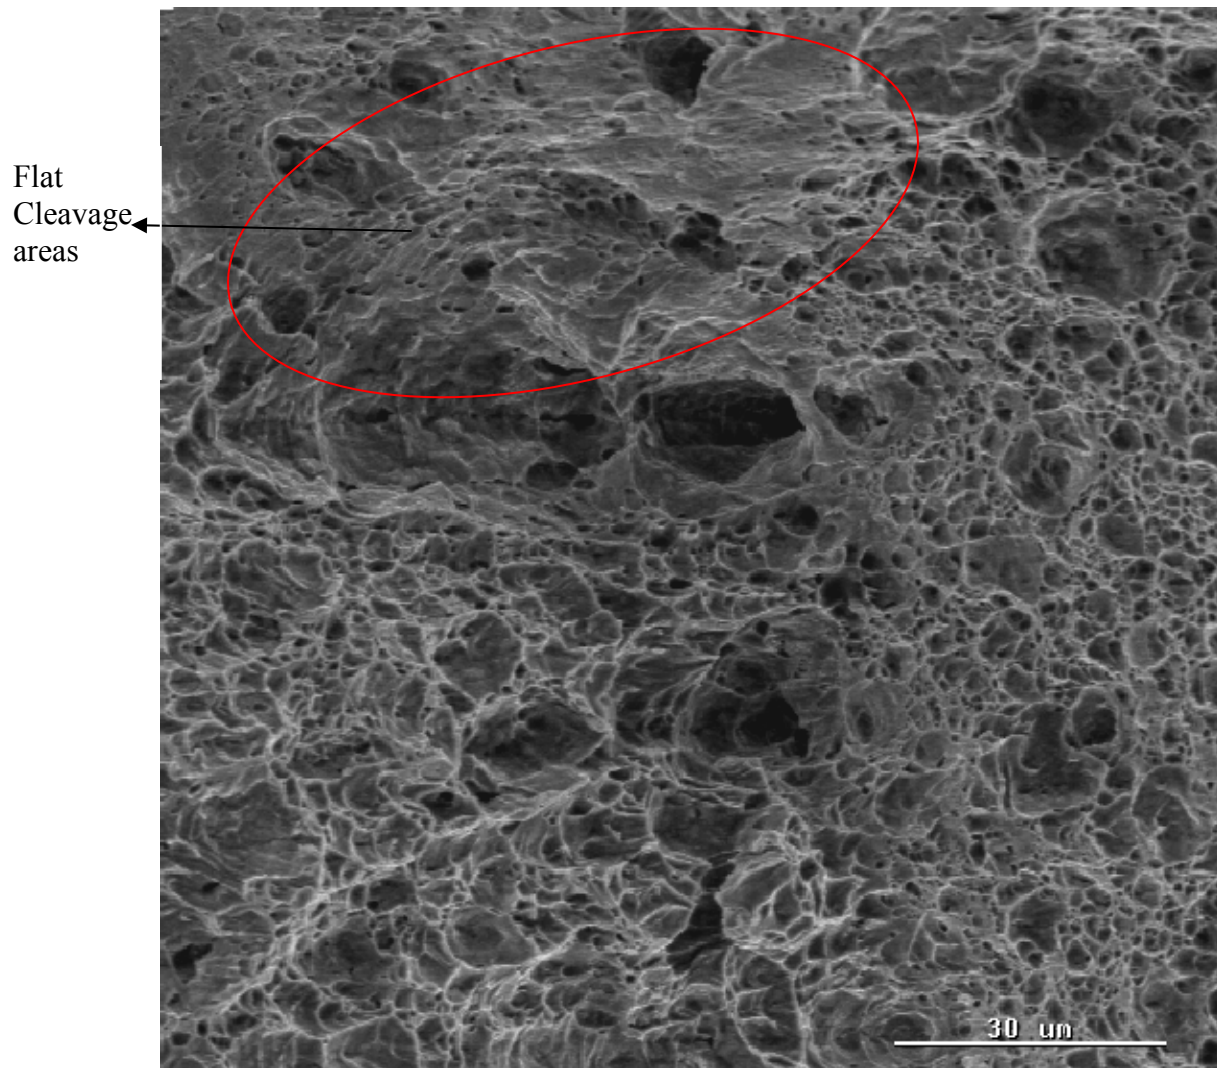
Tensile fracture surface of the lowest ductility sample showing flat interface areas.
